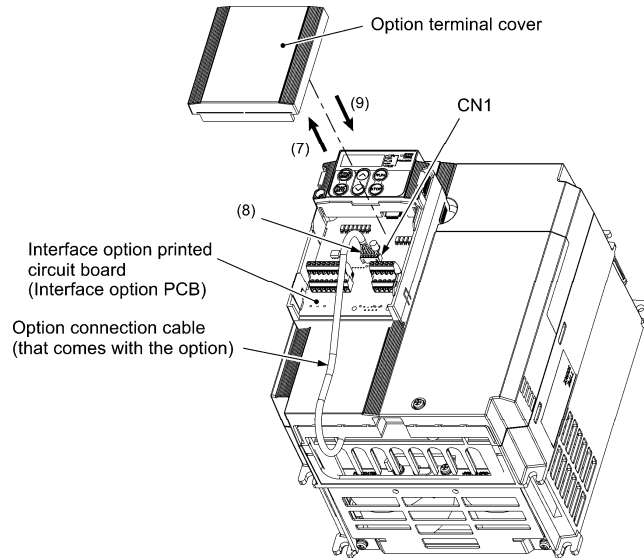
Connecting the Option Connection Cable to the Interface Option PCB
